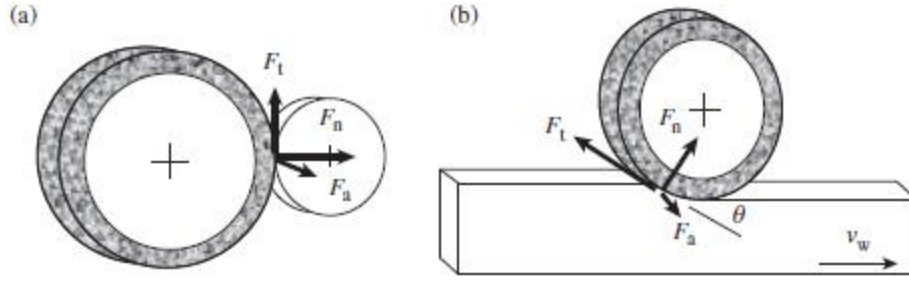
Three grinding force components shown (a) for small depth of cut during cylindrical grinding (b) large depth of cut for plunge surface grinding (exemplary to the type of grinding considered in this thesis)
